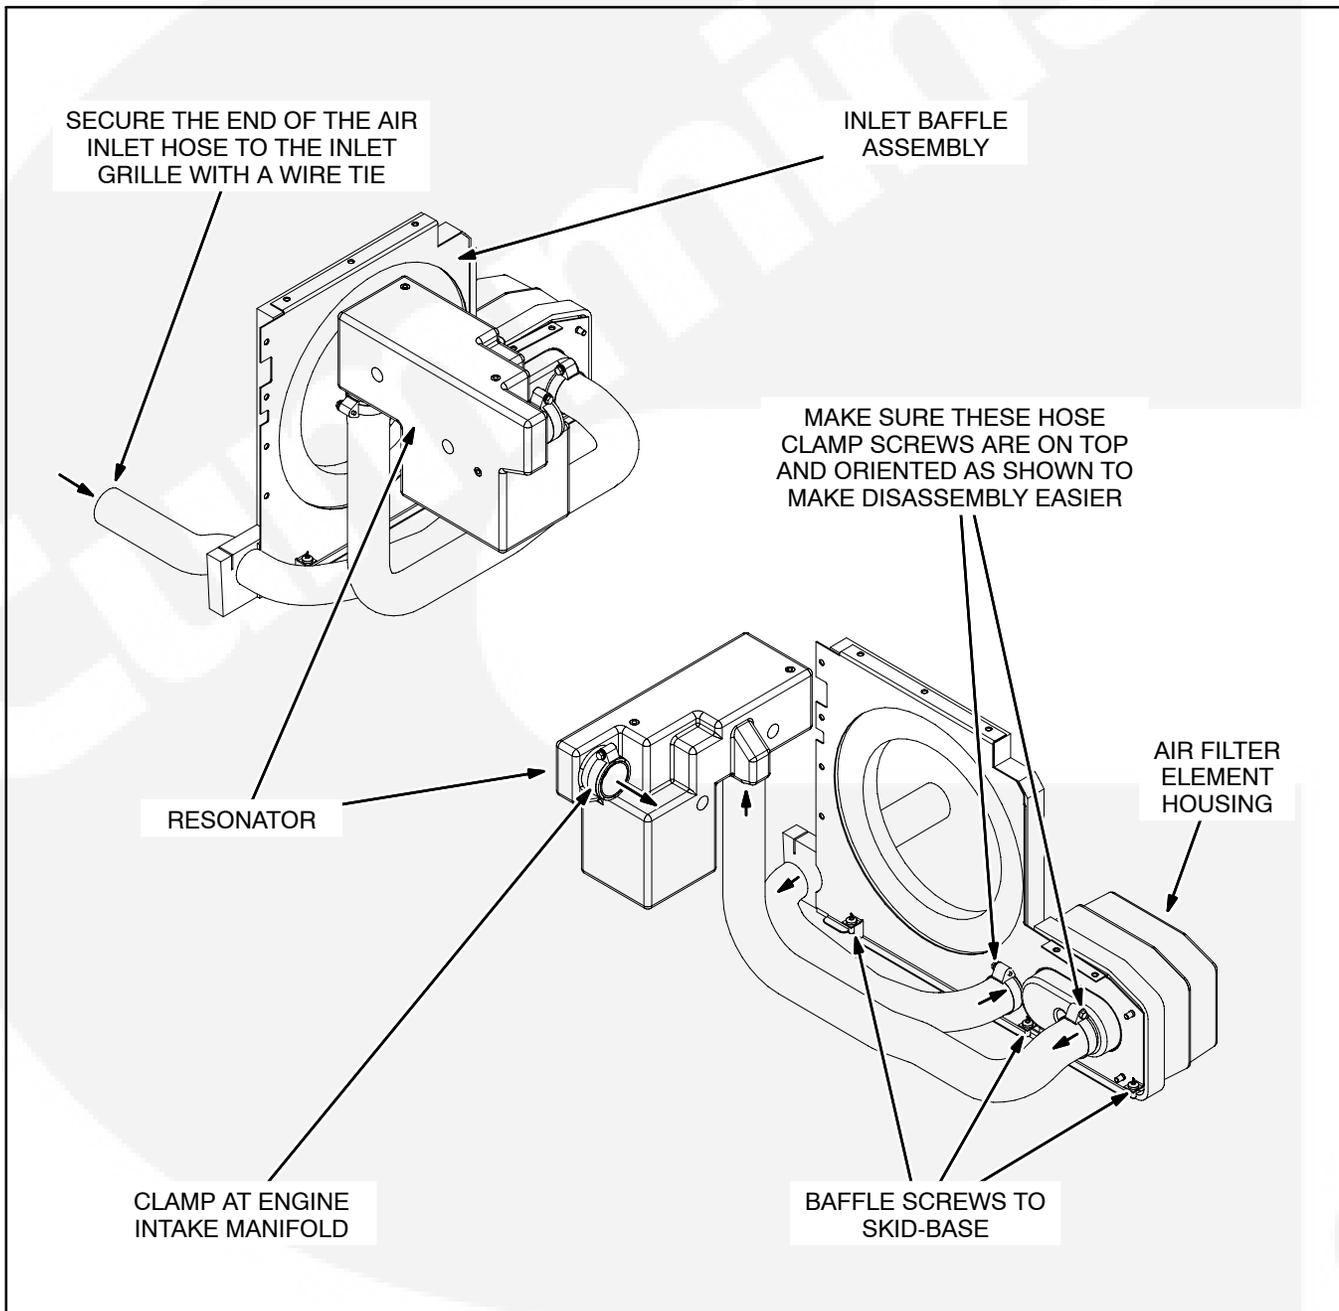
ENGINE AIR INTAKE ASSEMBLY
